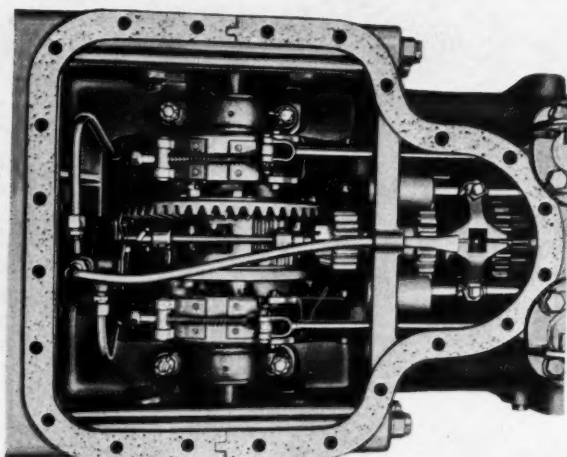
(Above) — Track driving wheel mechanism, showing antifriction bearing mounting of pinion and main drive shafts. Fig. 4 — (Right) — Transmission case with cover removed. Oil pipes are from pump at left of case
